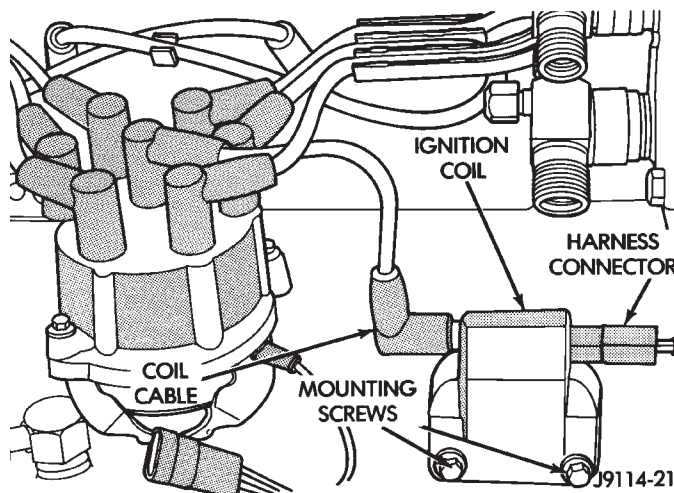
Ignition Coil—Typical (4.0L Shown)
